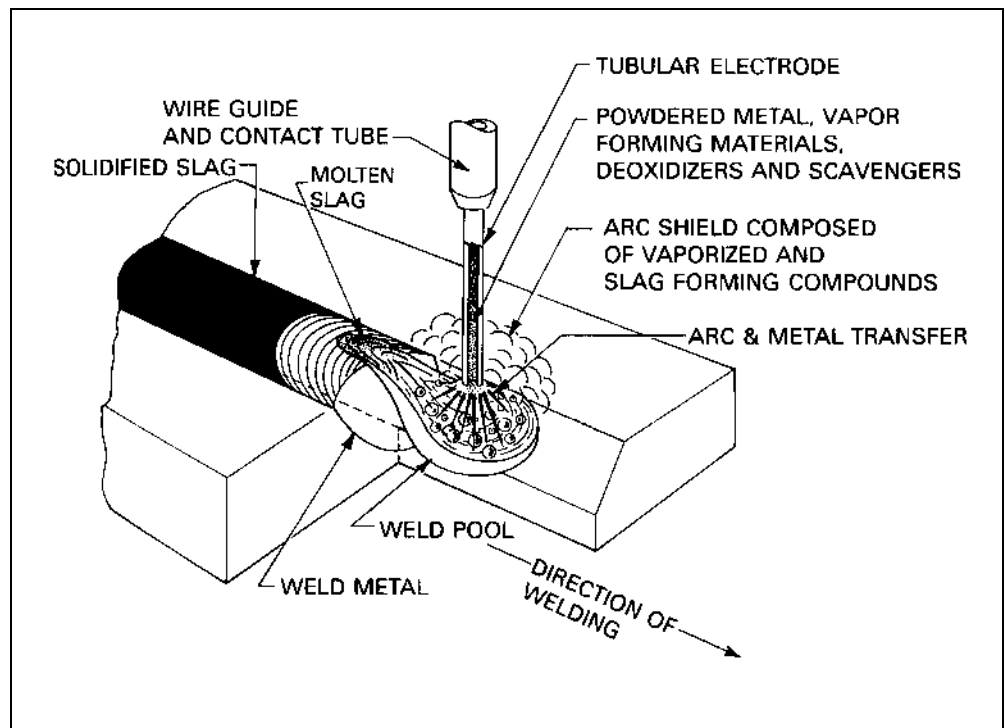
Self-shielded Flux Cored Arc Welding (FCAW-SS) *(Courtesy of the American Welding Society)
